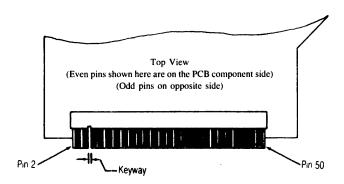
Basic Tape Drive QIC-36 Interface Connector J1
